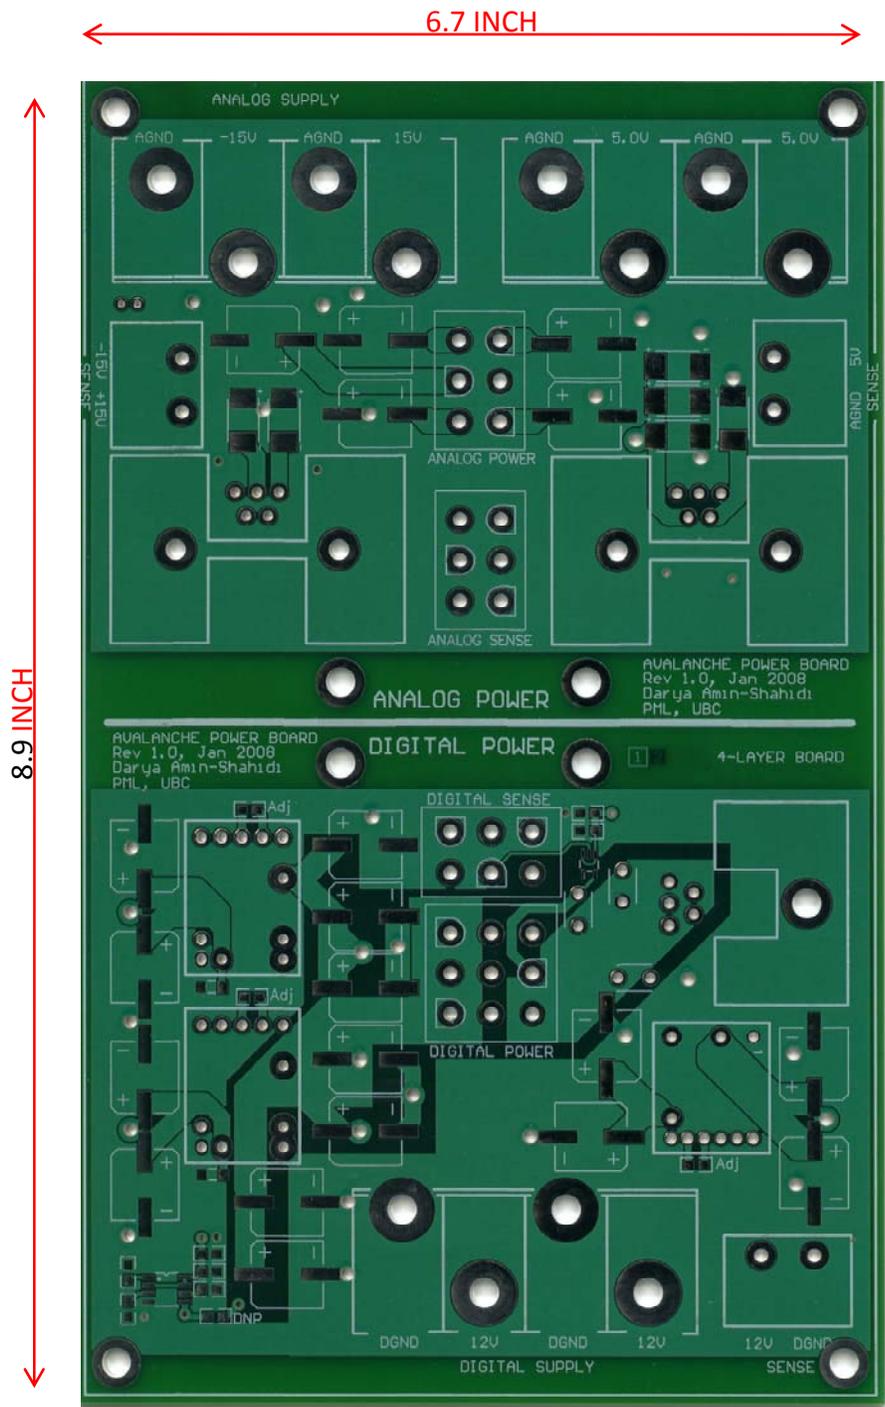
Top view of the powerboard's manufactured printed circuit board (PCB)
